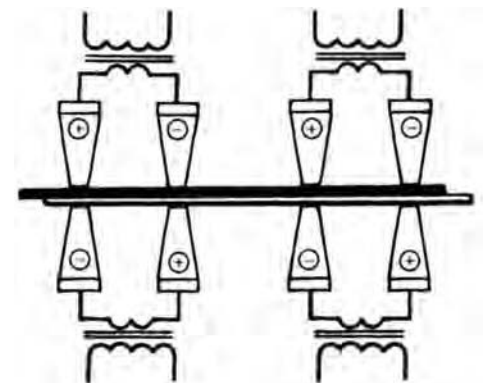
Two sets of push-pull transformer arrangements for direct spot welding
